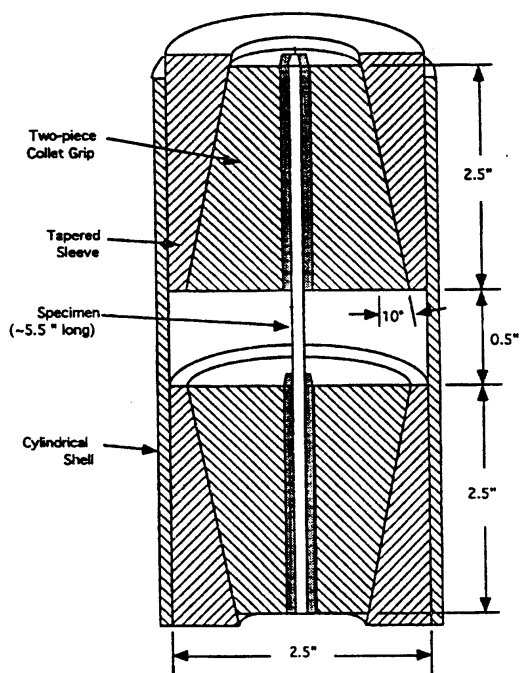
(a) Schematic of ASTM D 3410-87 method A test fixture and specimen.
